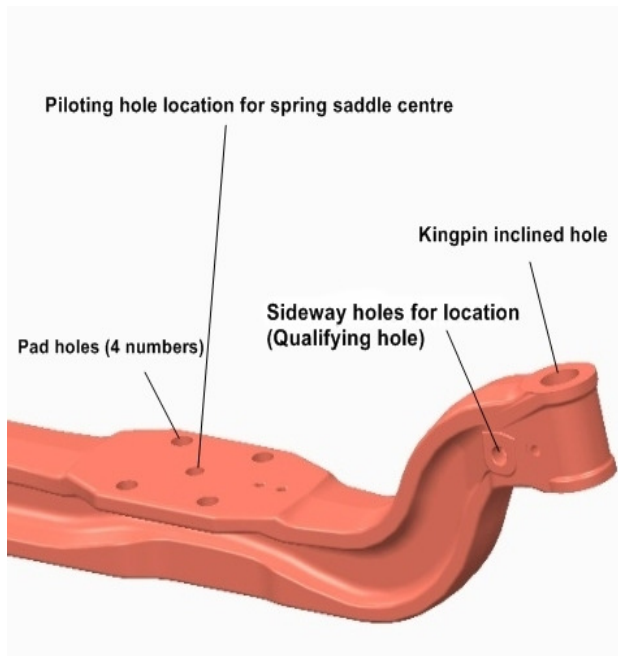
Representation of pad holes, piloting holes, Sideway hole and inclined king pin hole
